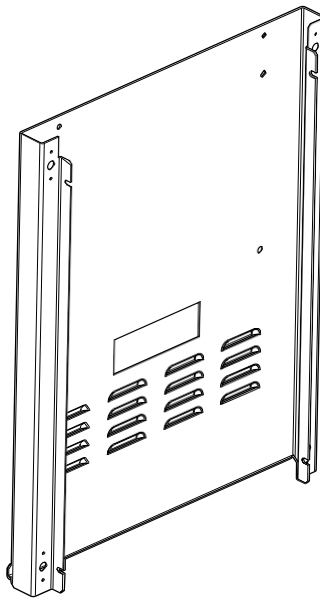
QS Panel Assembly (Part # 2A95872WH)
